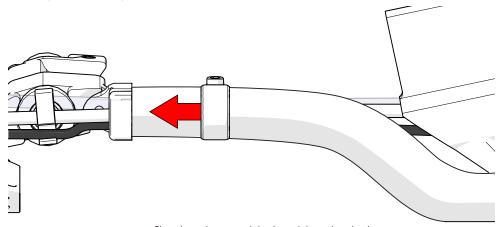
Place sleeve clamp around sleeving and sleeve clamp bracket
